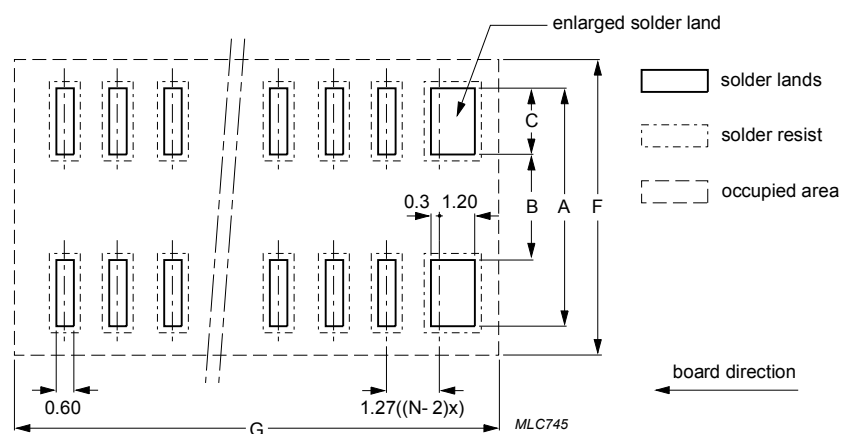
Wave soldering footprint for SO16 (SOT109-3)
